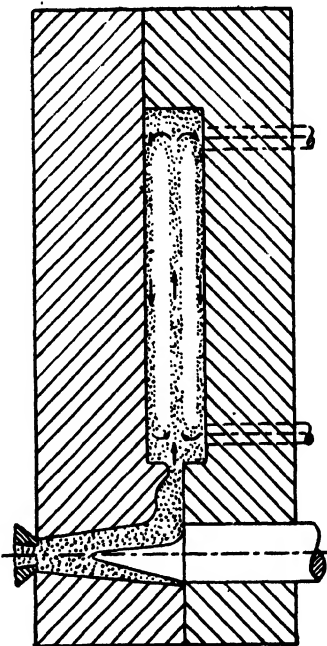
Sketch showing how air and vapor are trapped in a casting when the molten metal is squirted into the die.
